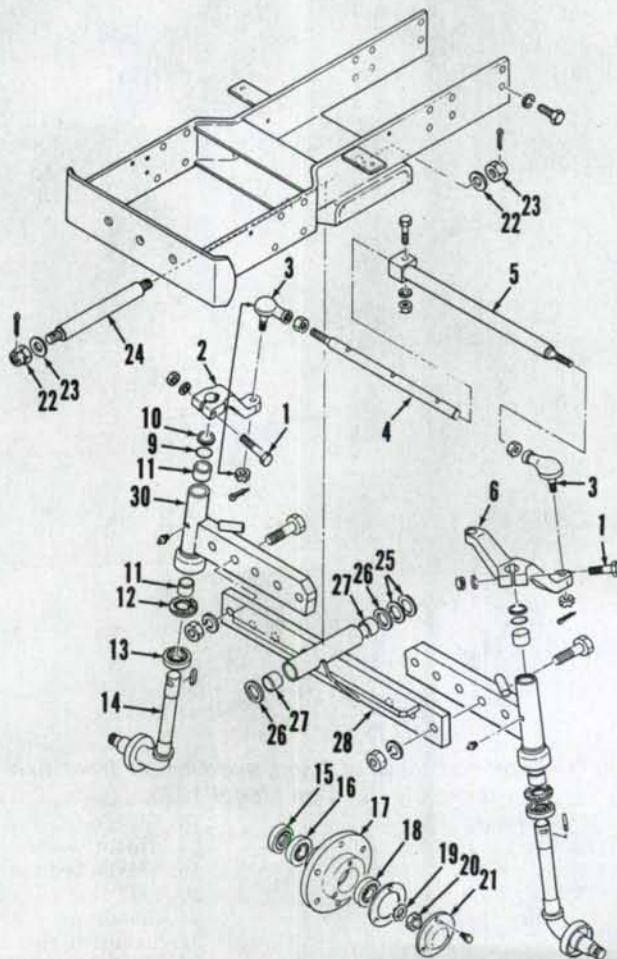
Exploded view of adjustable tread width front axle assembly used on Models 1120 and 1220 equipped with mechanical steering. Refer to Fig. 1 for legend except for the following:
